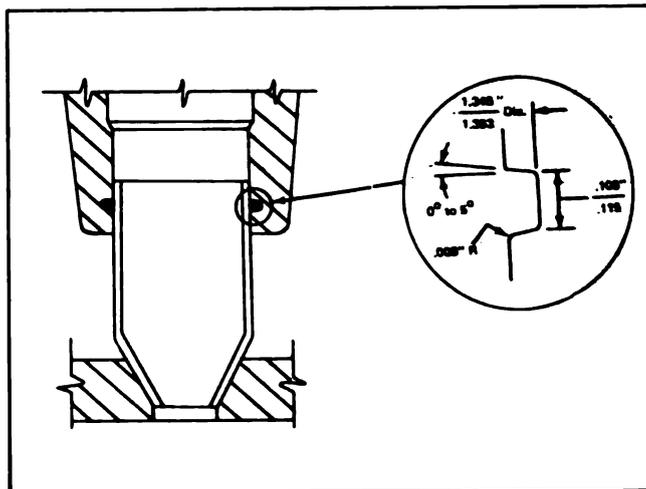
(V40244). The O-Ring Groove In The Cylinder Head.
